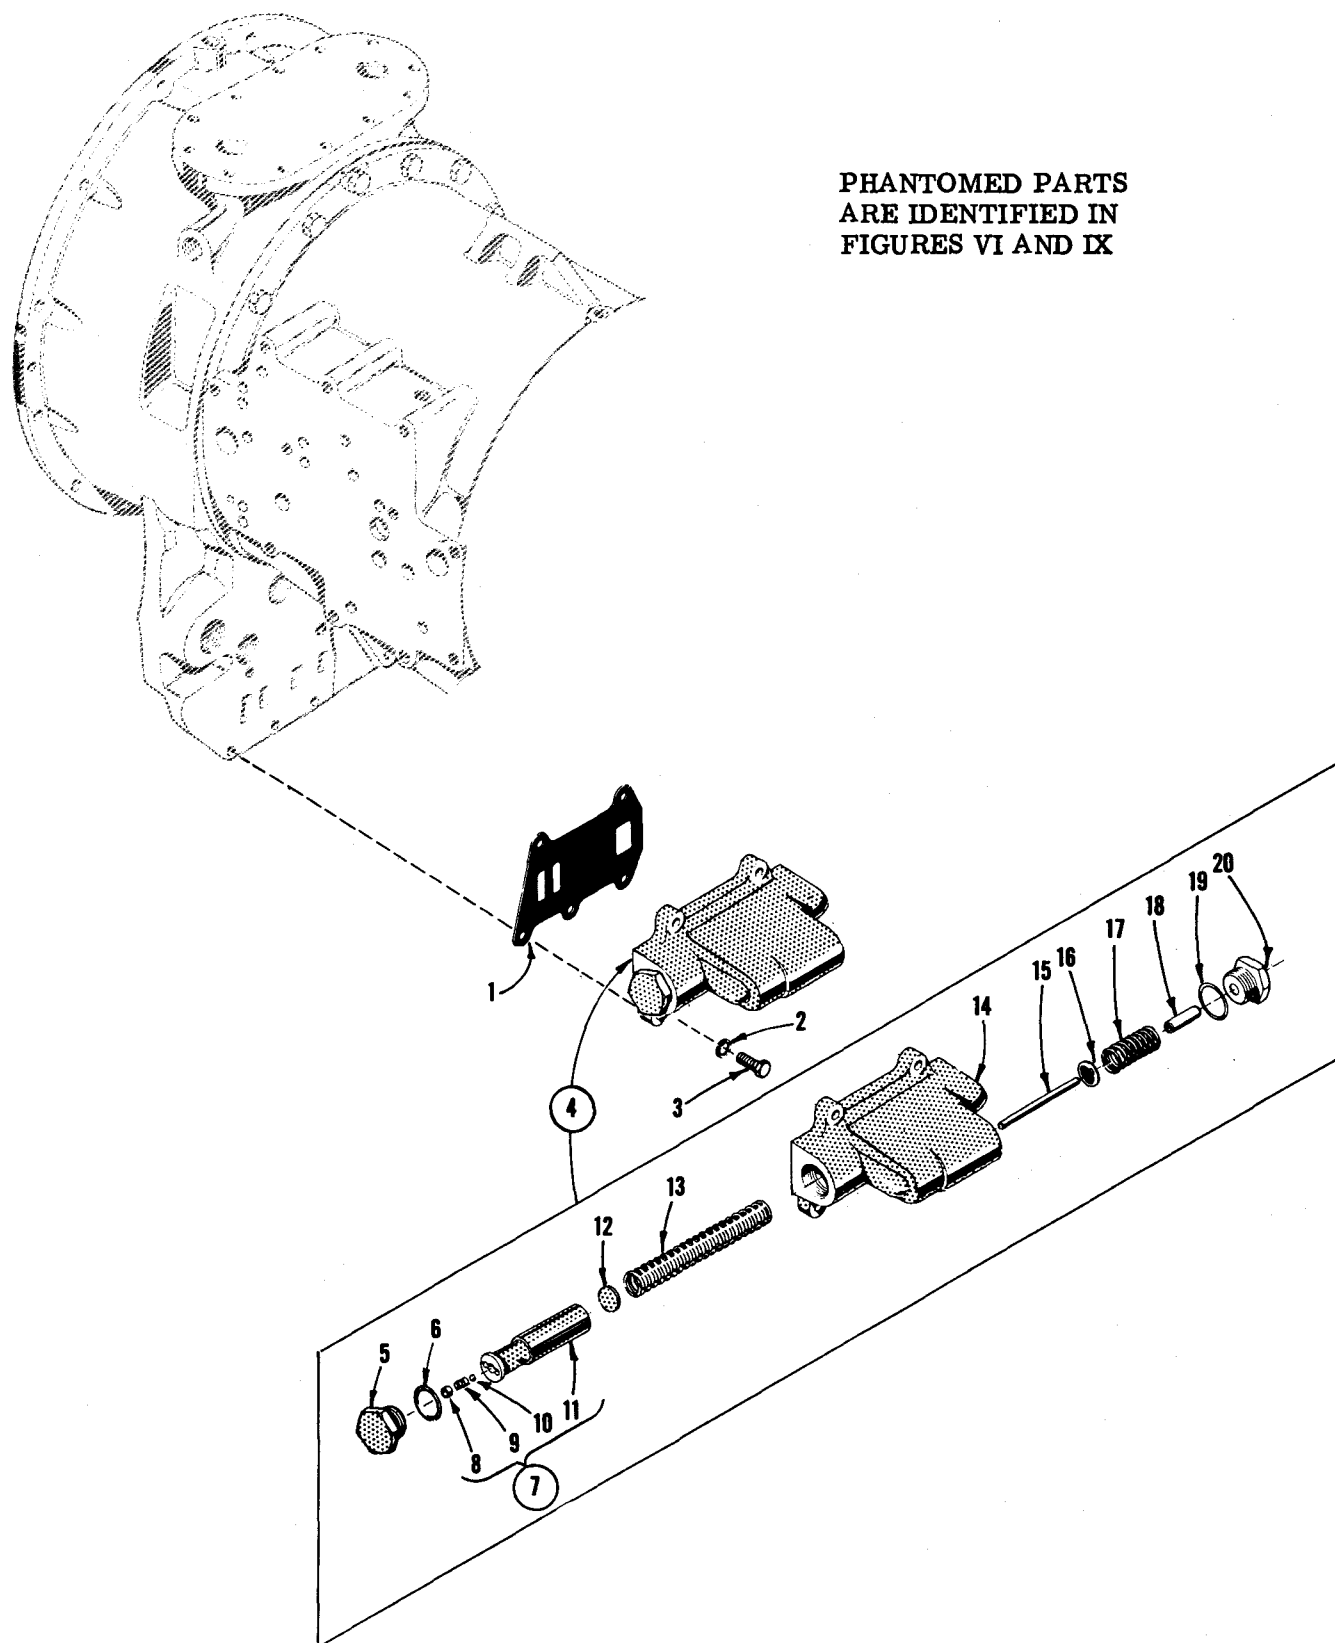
FIG XX. PRESSURE REGULATOR VALVE, EXPLODED VIEW
